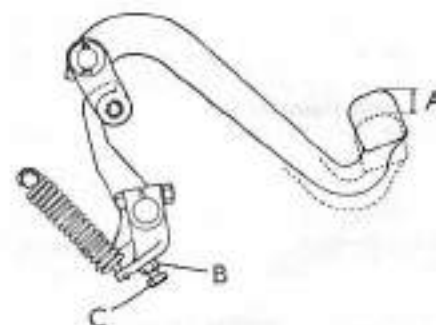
On models 880 and 990, adjust clutch pedal free play by loosening lock nut (B) and turning screw (C).
